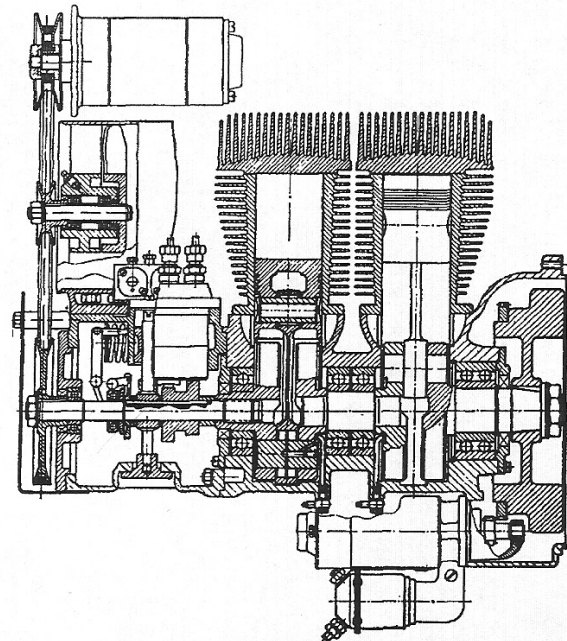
Gutbrod 12-hp, 2-cyl engine
